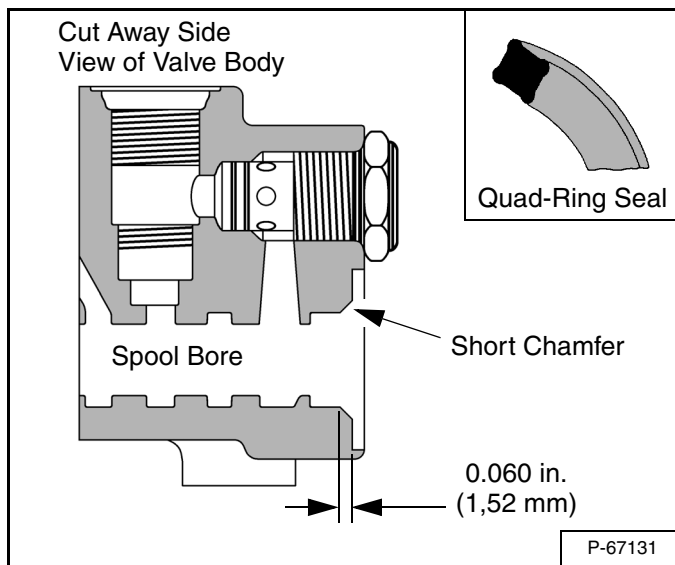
Control valves with a notch in the spool bore require a quad-ring seal. Remove the control valve from the machine and install the quad-ring seal in the spool bore notch.
